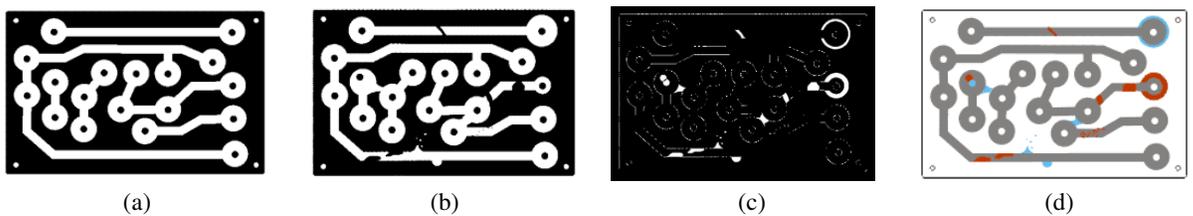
(a) Standard PCB. (b) Inspected PCB. (c) Binary image. (d) Colored image.
